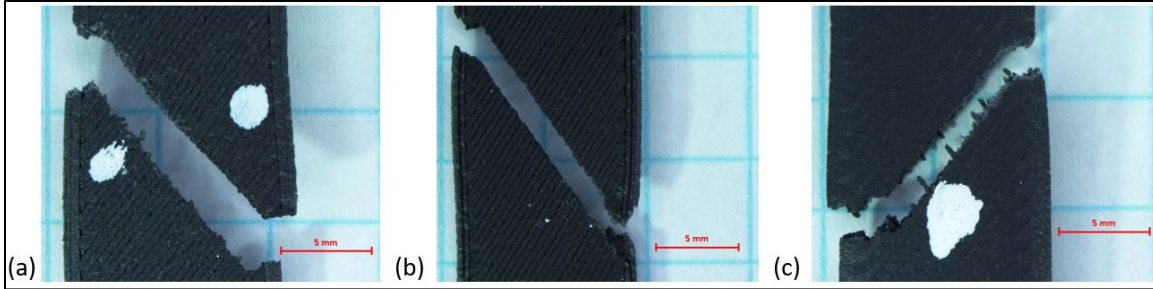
Fractured tensile specimens (a) 1-1, (b) 1-2, and (c) 1-3 printed flat on print bed with 100% infill of Onyx® material.
